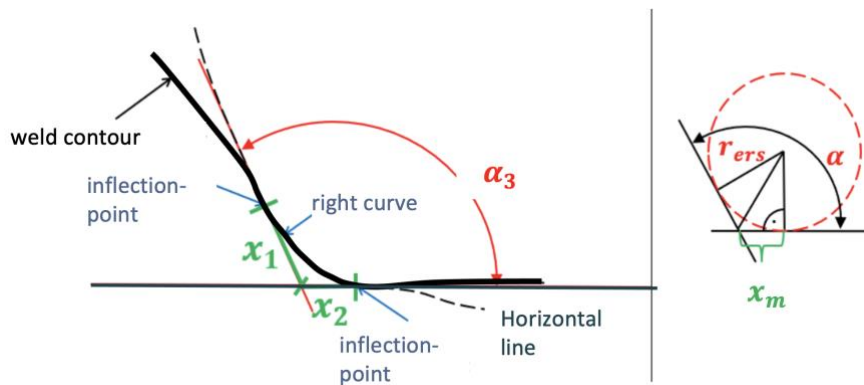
Schematic presentation of the weld angle measurement technique
